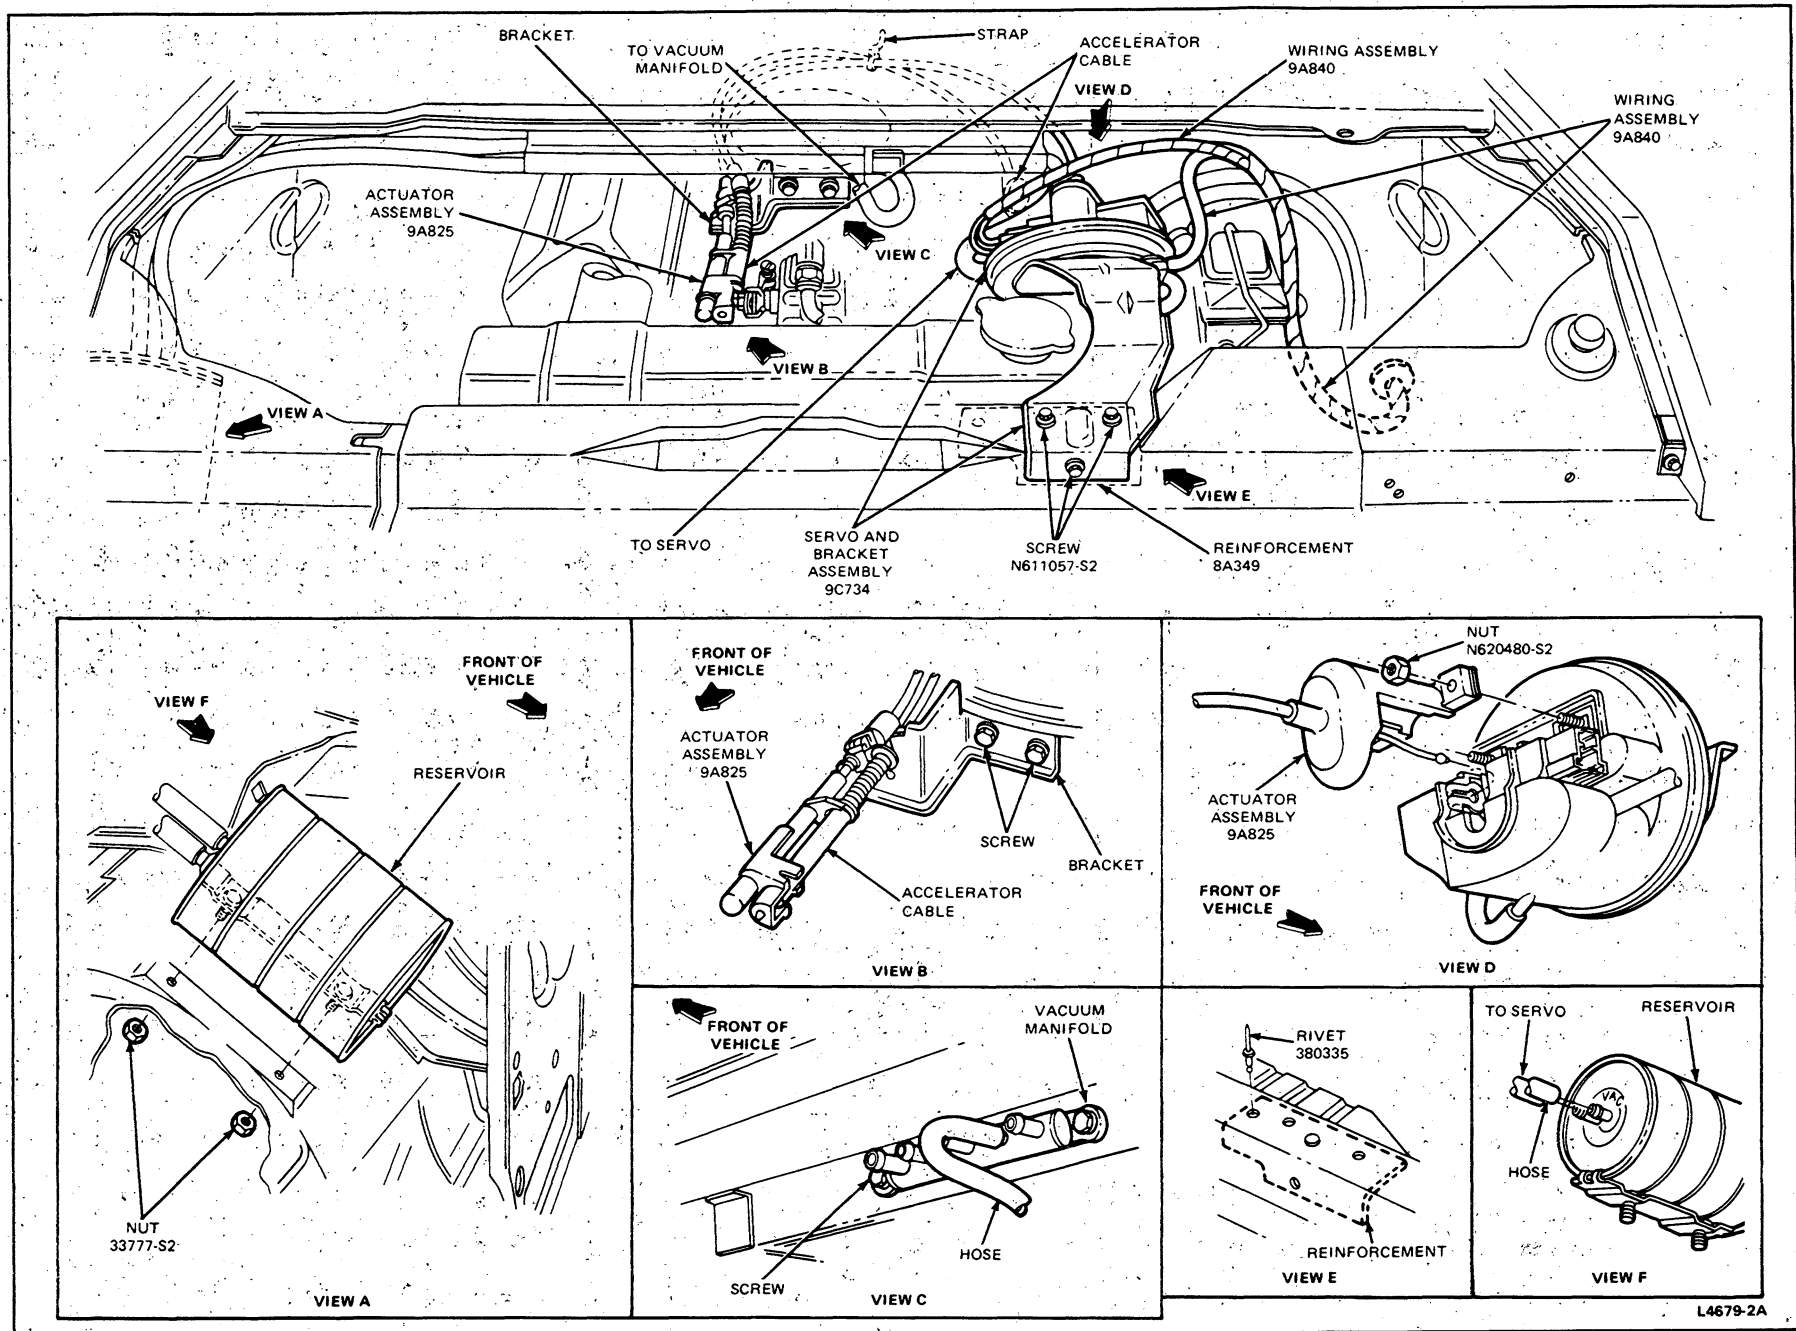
Servo and Cable Installation—E-250—E-350 with 7.3L Diesel Engine
